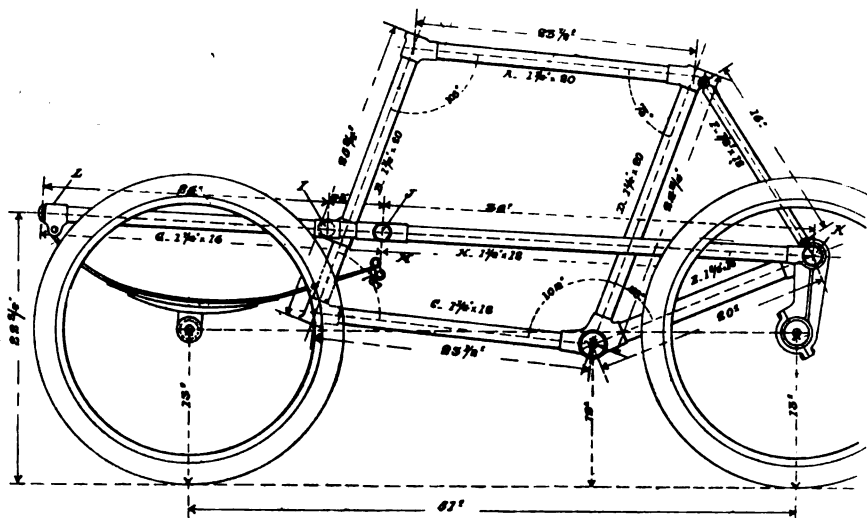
SIDE VIEW OF MOTOR QUADRICYCLE FRAMING.
